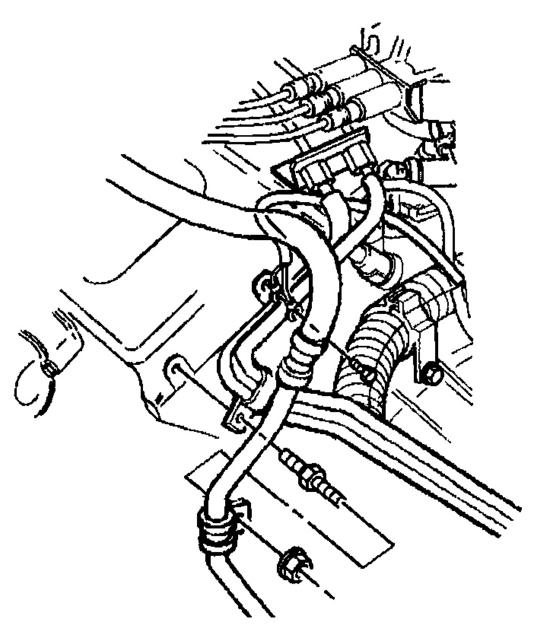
Installing EGR Valve Inlet Pipe Courtesy of GENERAL MOTORS CORP.
